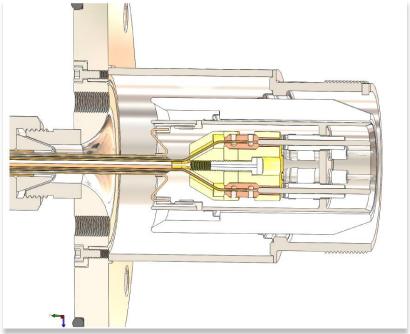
30 kV – 6 pins HV feedthrough cross section – vacuum cable interface part. Courtesy of CERAMTEC
